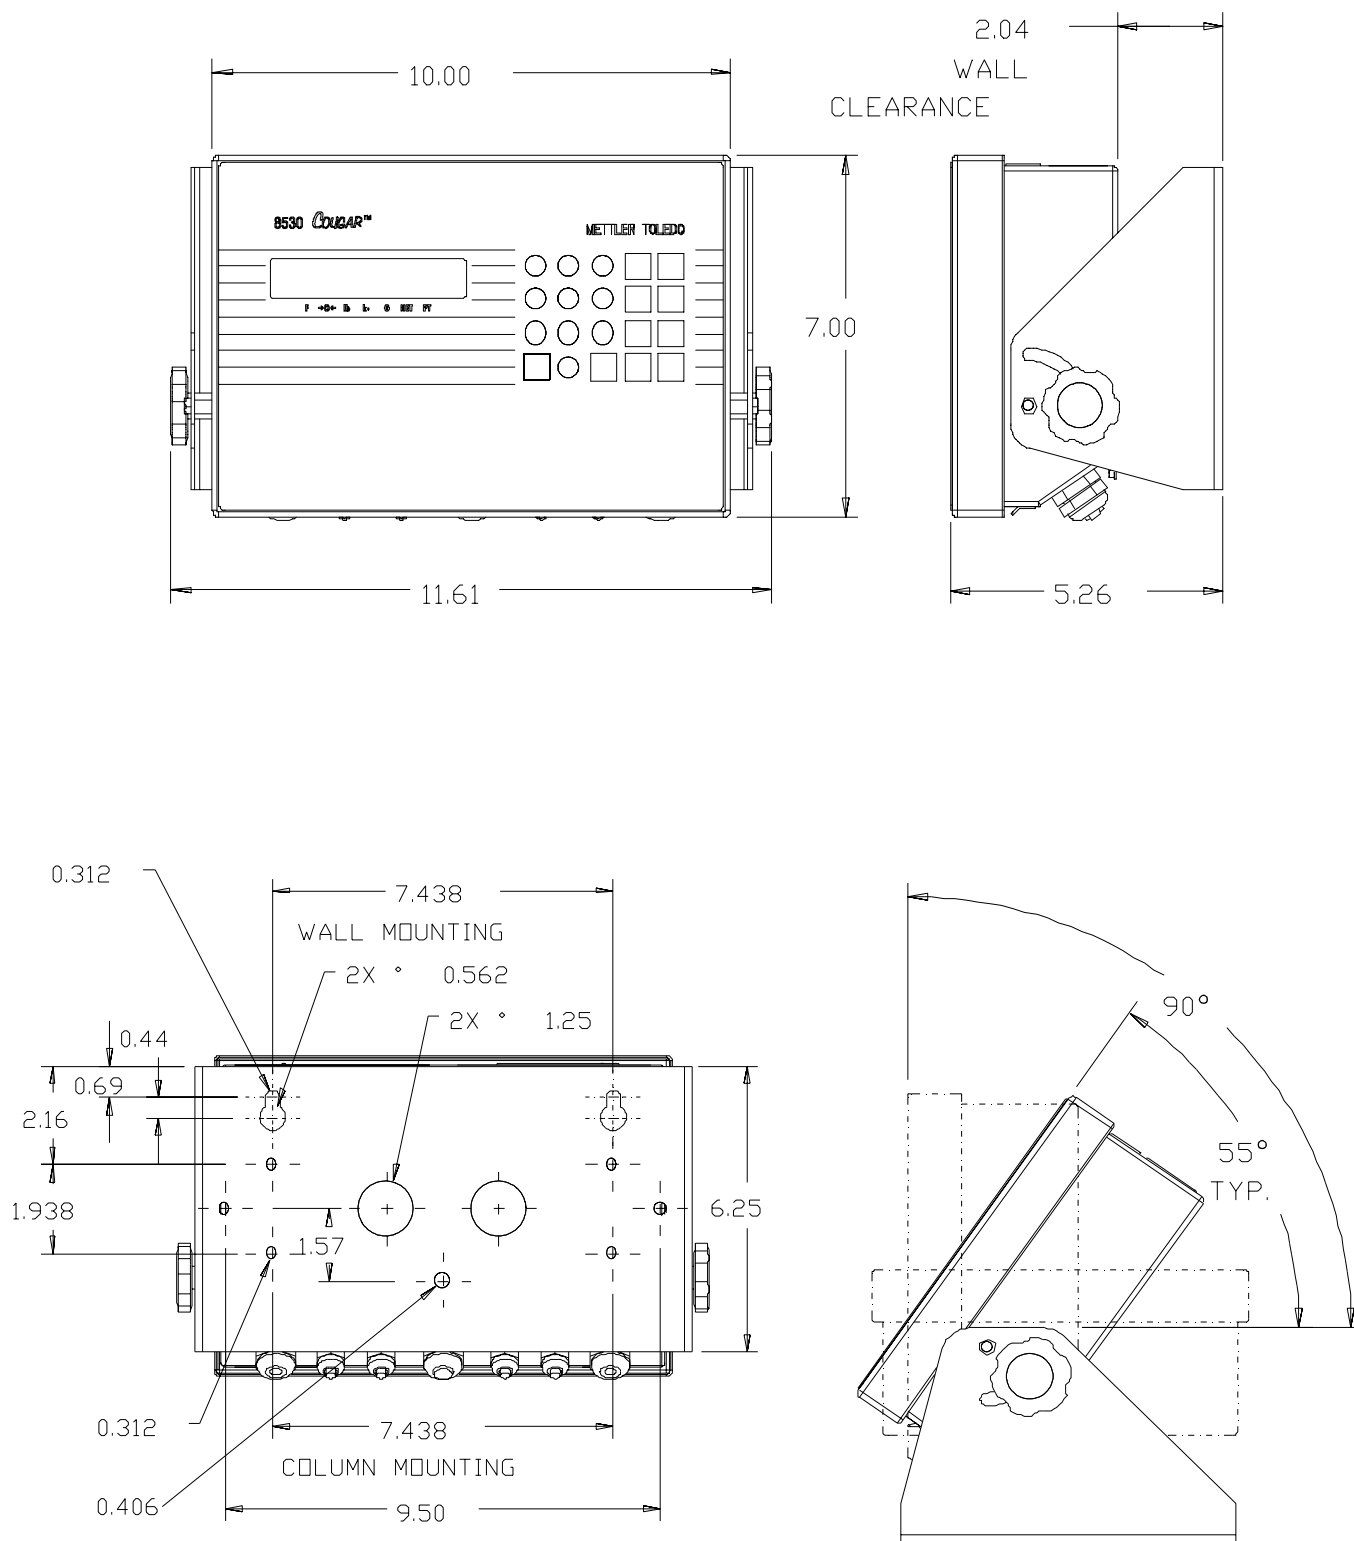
Cougar Terminal Dimensions (Dimensions shown are in inches)
